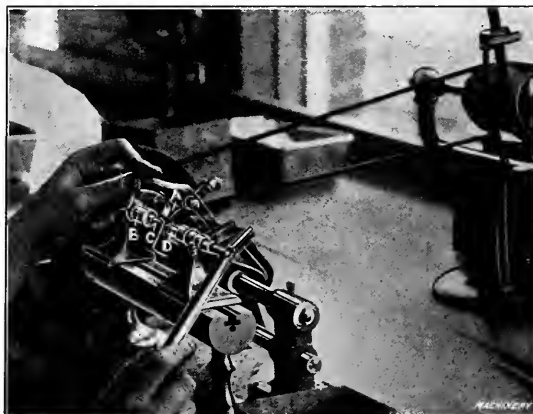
Bench Lathe with Special Chasing Attachment for turning Bushings
